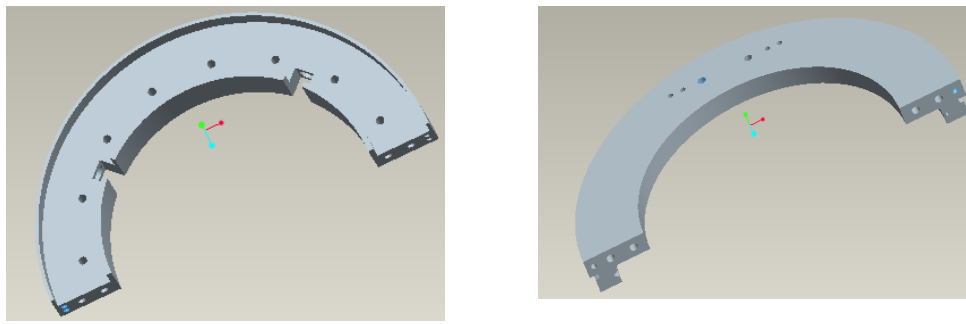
Pro-E drawing parts (a) Stationary split frame (b) Rotating split frame.
